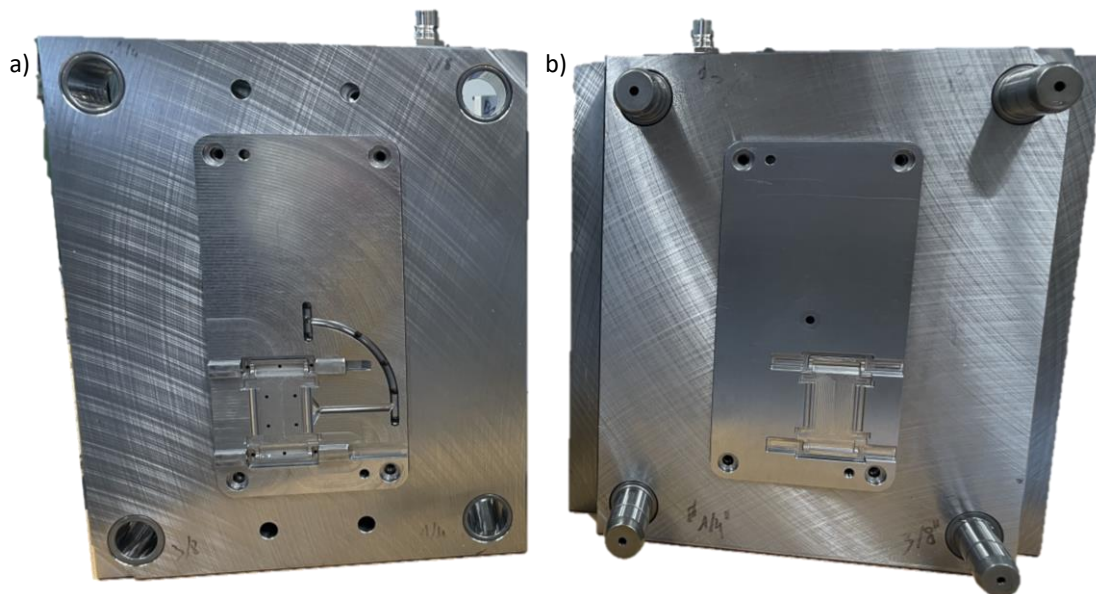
a) Moving and b) fixed mould halves with the respective inserts [75]
